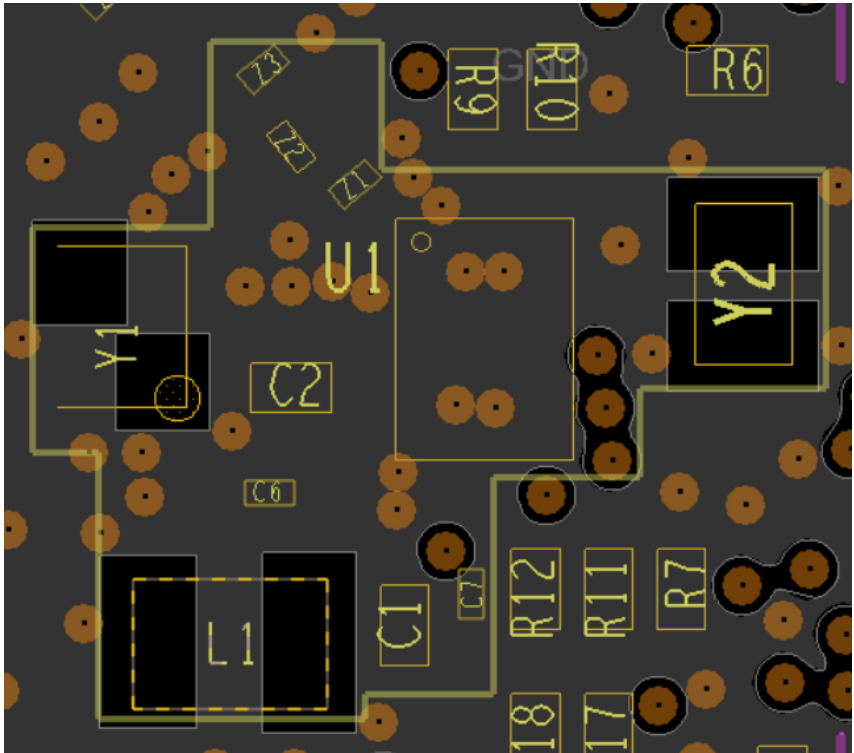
FCGQFN24 PCB Placement and Routing – GND Plane - INT1 Layer
